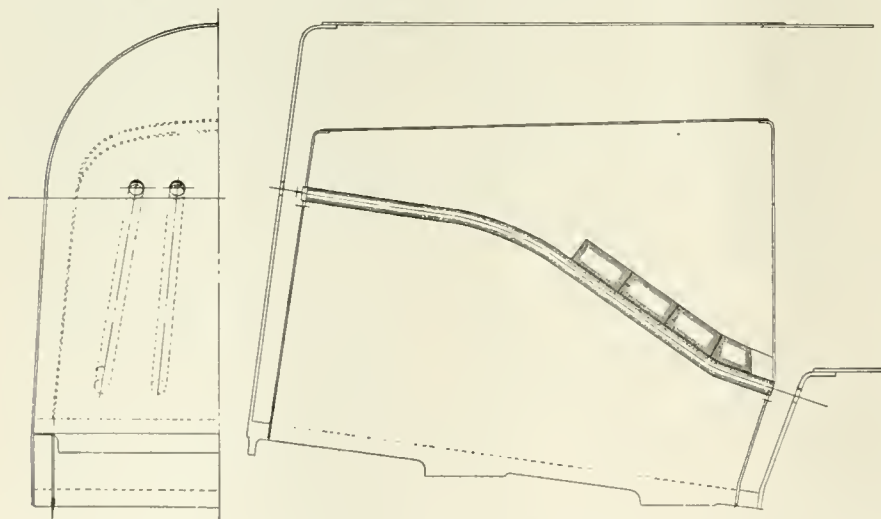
BRICK ARCH IN POSITION ON SUPPORTING TUBES.
